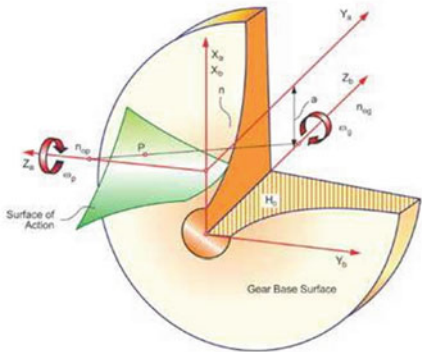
Surface of action connecting the gear and pinion base surfaces.
